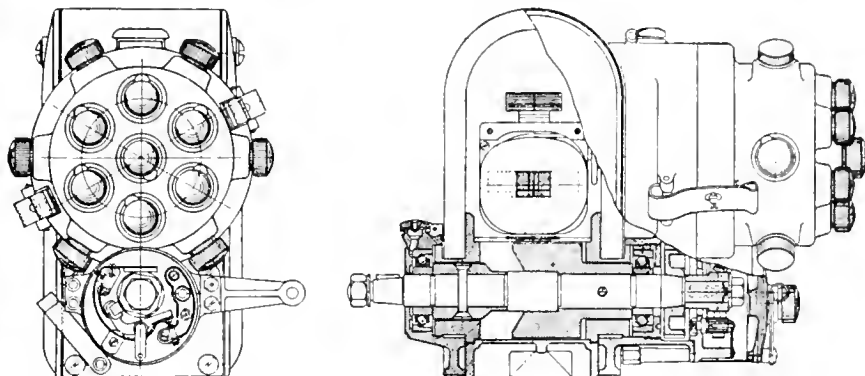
ASSEMBLY OF B.T.H. 12-CYLINDER POLAR INDUCTOR TYPE MAGNETO.
